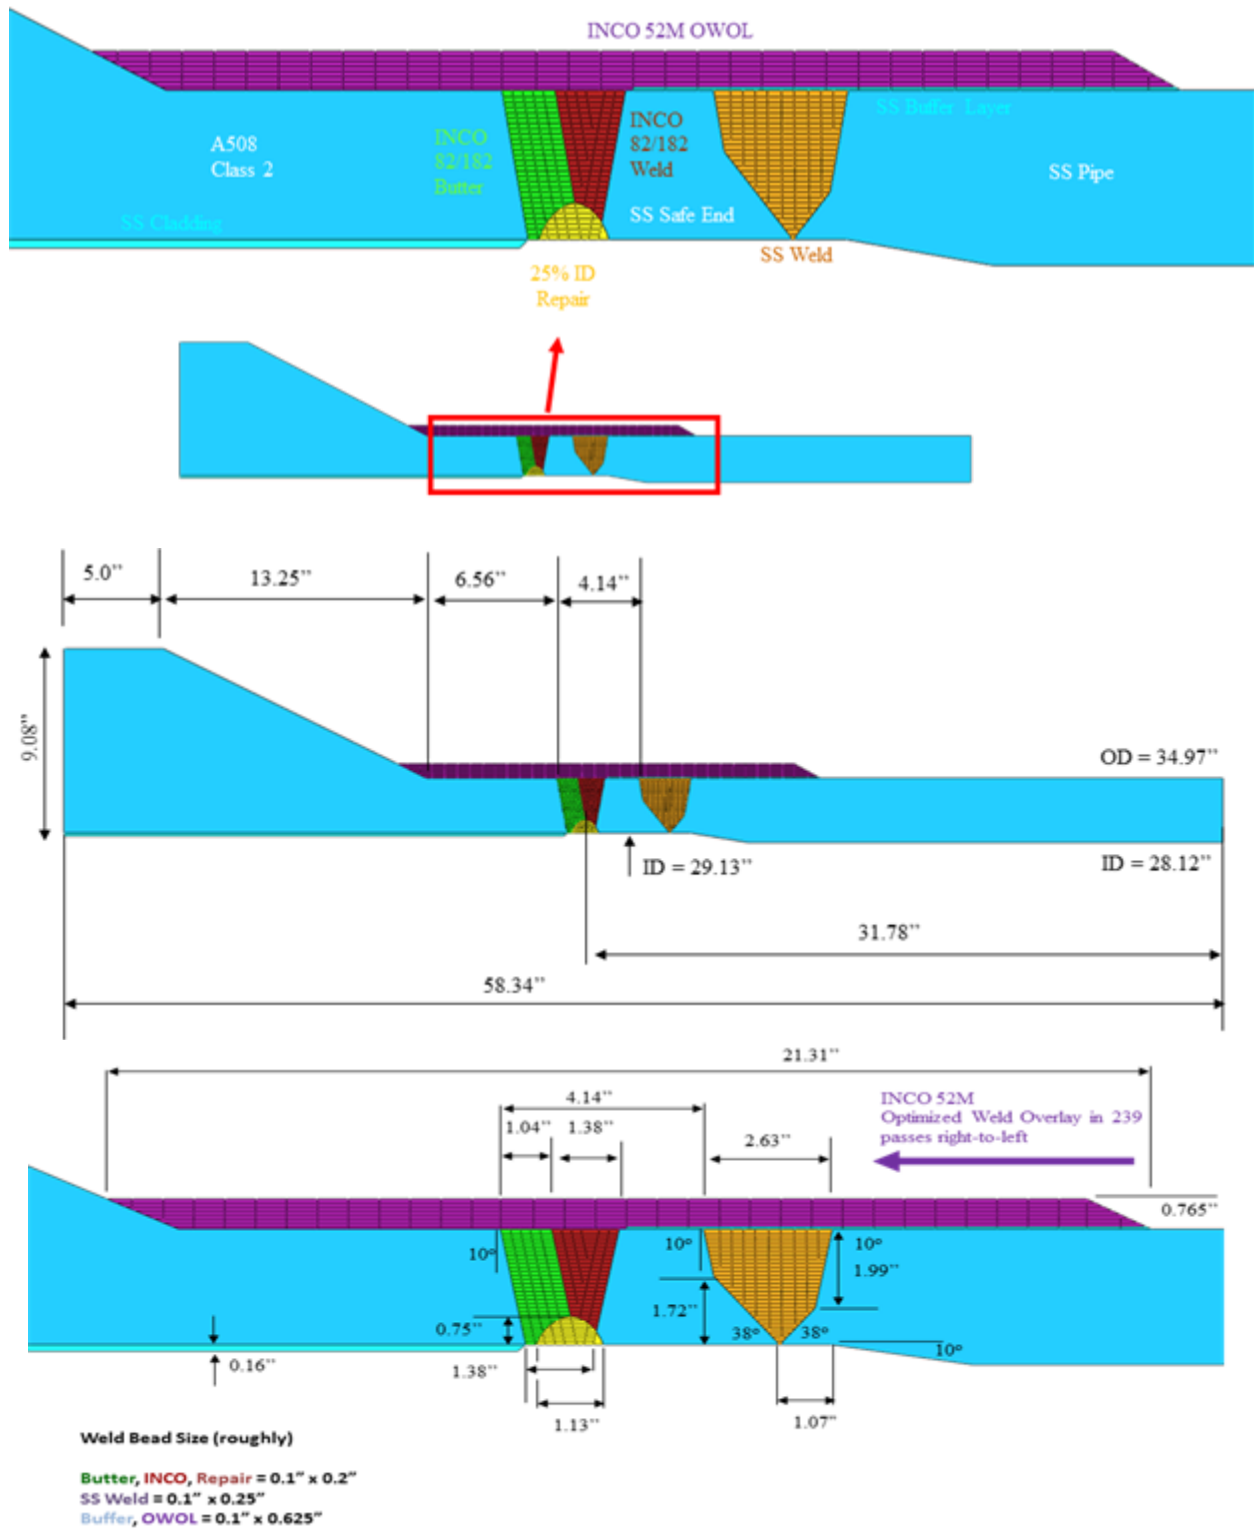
Cold Leg Nozzle Geometry and Material Details
